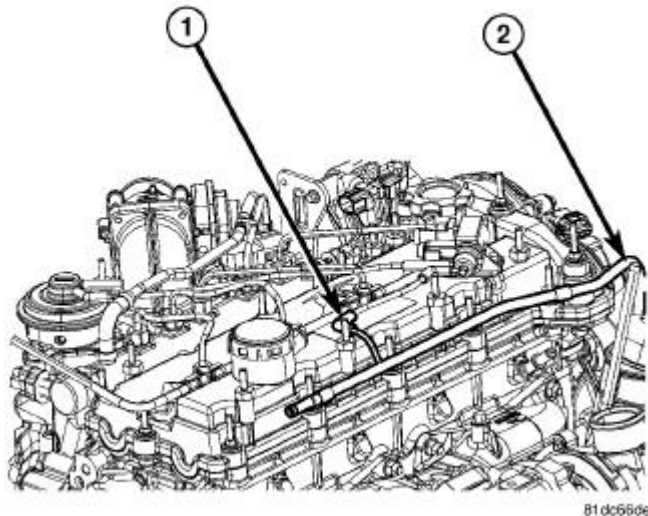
CRANKCASE VENT HOSE & OIL SEPARATOR
